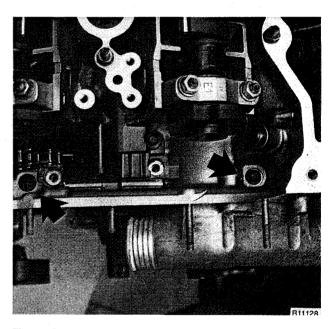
Cylinder head-to-timing chain cover mounting bolts (arrows).
